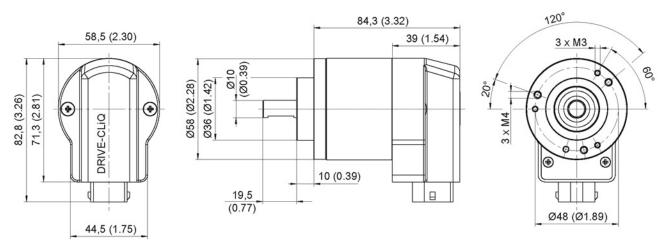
Dimension drawing of clamping flange, all data in mm and (inches)
